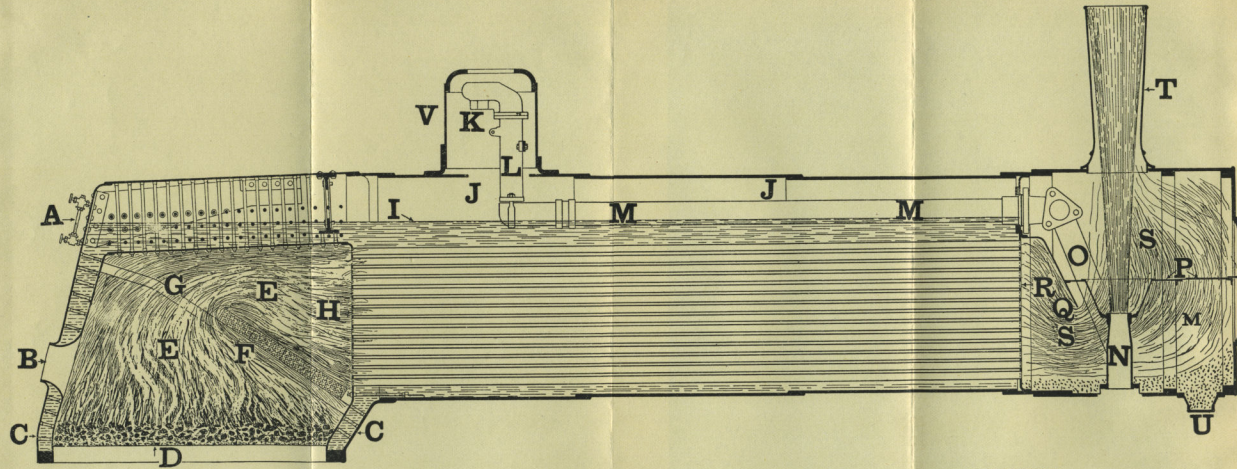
PLATE TWO—DRAWING TO SHOW A LOCOMOTIVE BOILER—CUT IN HALF—LENGTHWISE.
